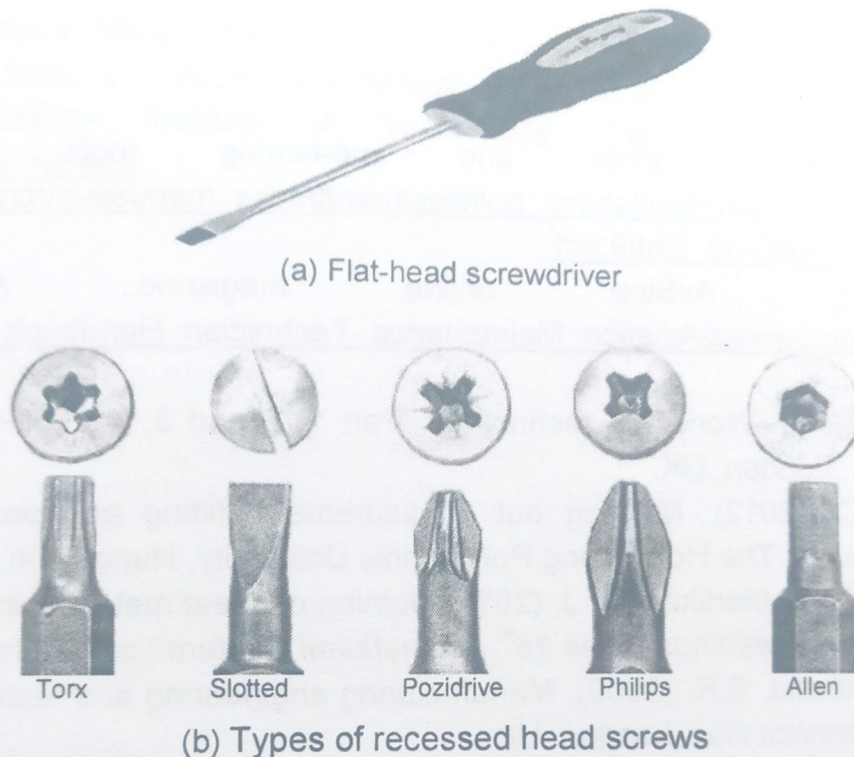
Pictorial illustration of a screwdriver, showing the flat head screwdriver in (a) and types of recessed head screws in (b)
